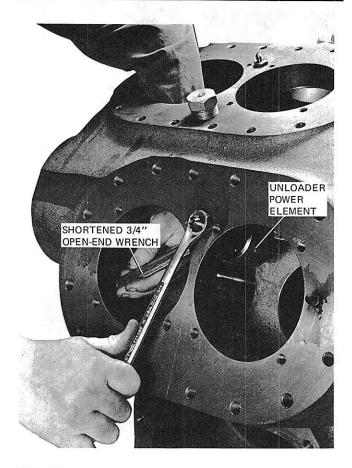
INSTALLING UNLOADER POWER ELEMENT
